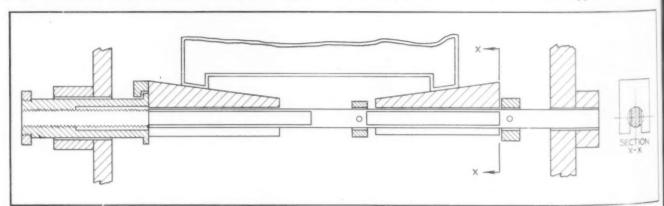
This equalizer is used where rest or locator must accommodate two varying or rough surfaces so that both surfaces will be properly supported. Unit acts as screw and nut: resistance results when nut is turned on screw. Tapered shoe at left acts as nut;
